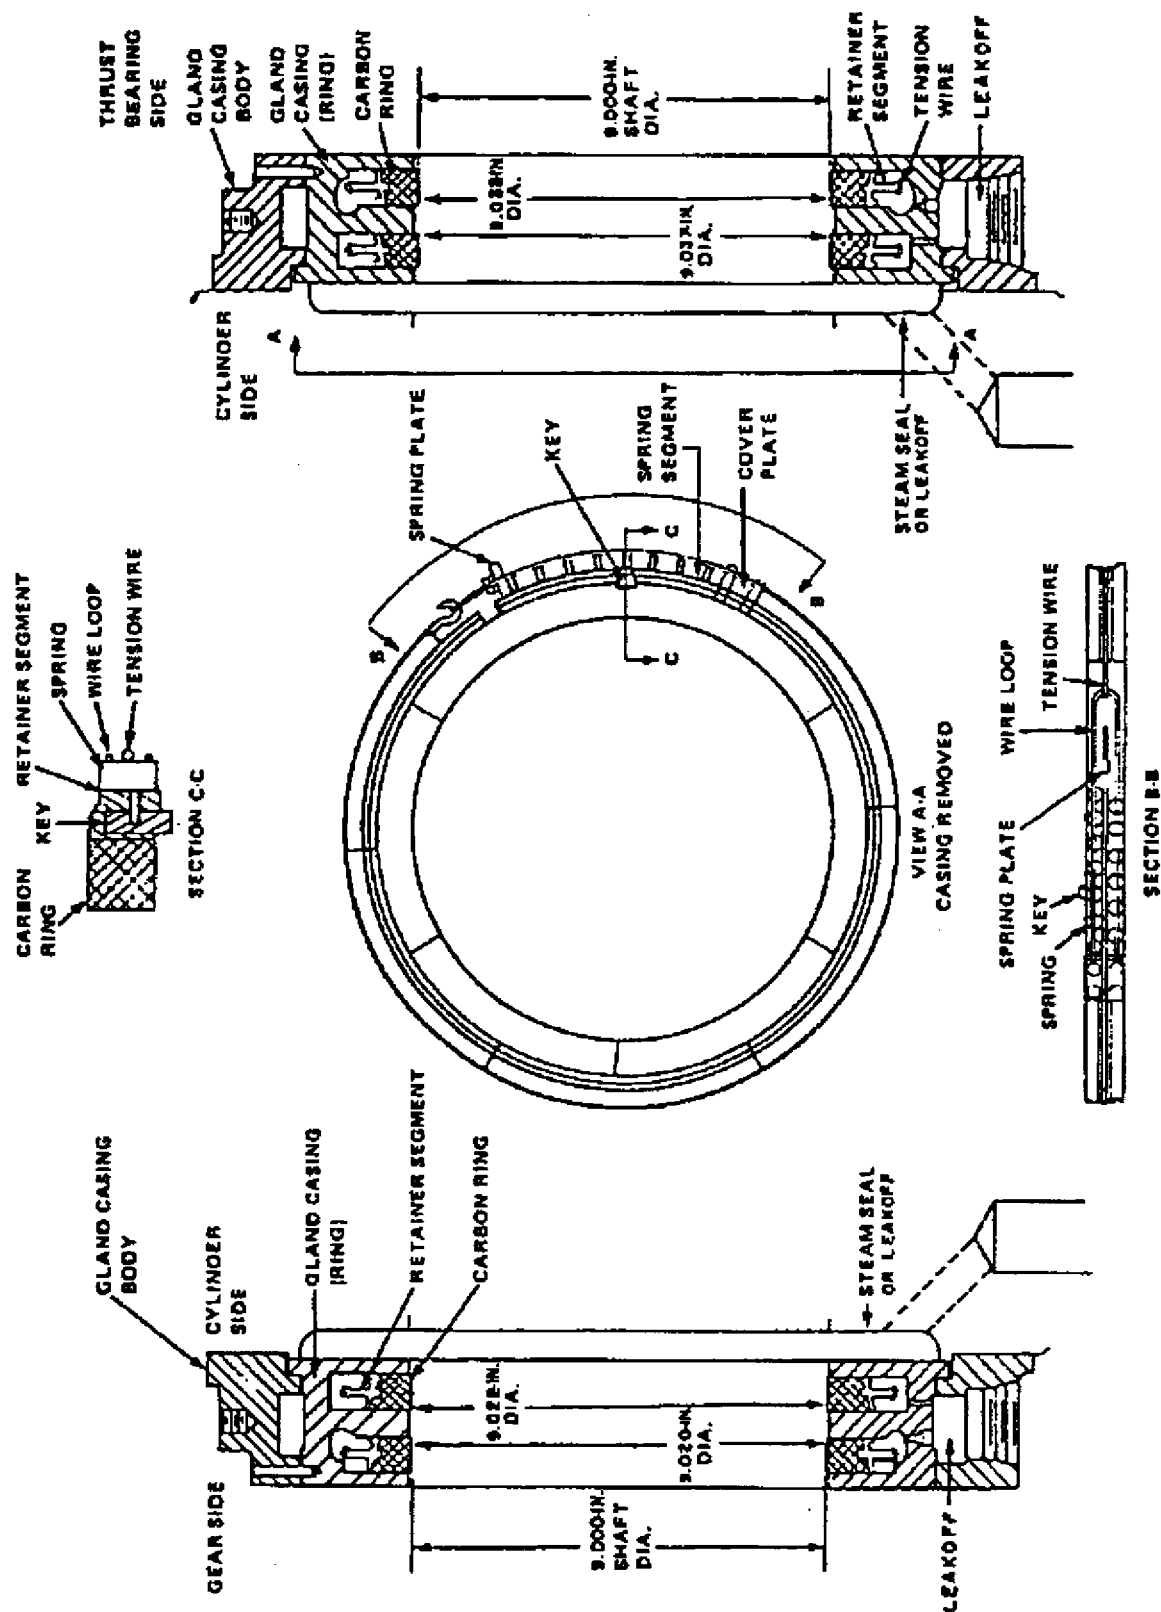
Shaft Packing Gland Rings (Carbon)
